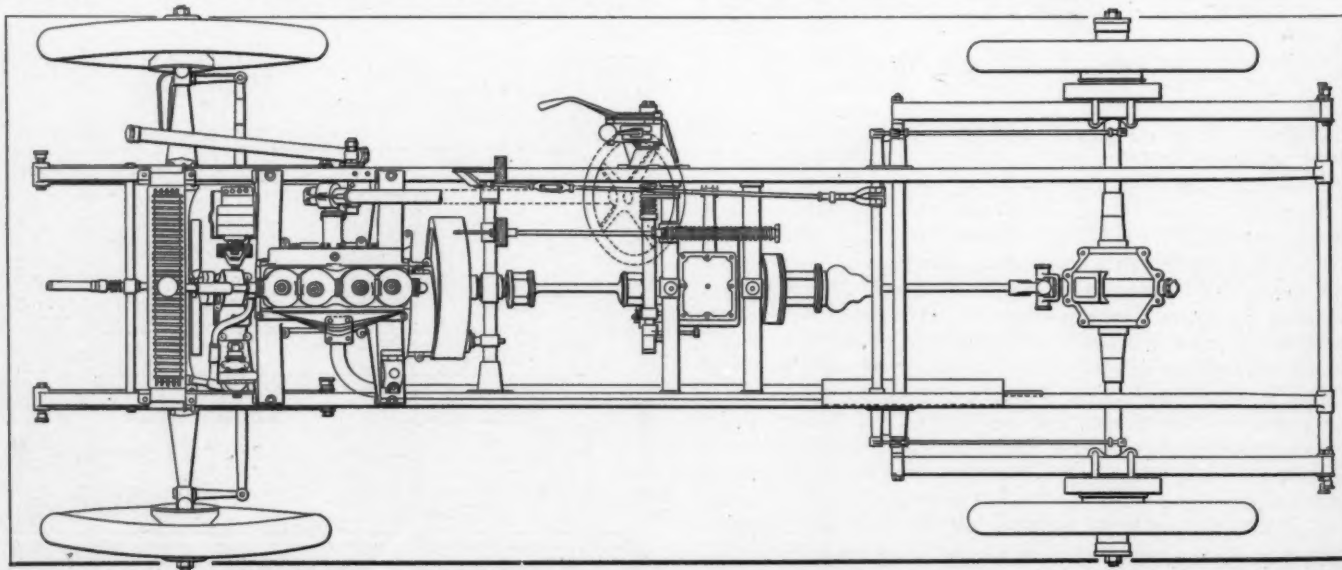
Plan view of Knight Daimler chassis, showing external clutch spring and double universal jointed shaft between gear box and engine
